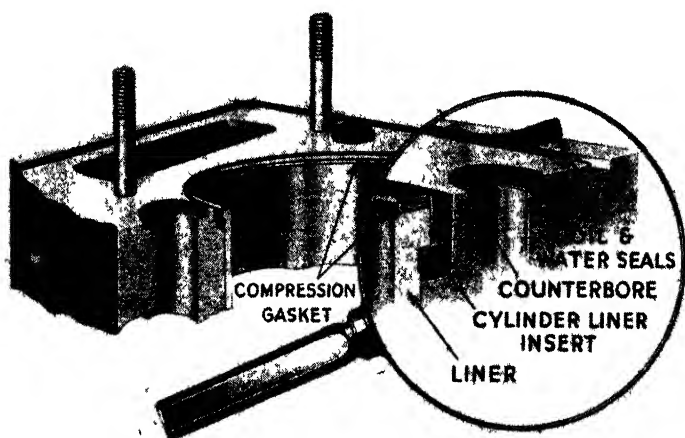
CYLINDER-HEAD GASKET OIL AND WATER SEALS OF G M SERIES 71 ENGINE.
